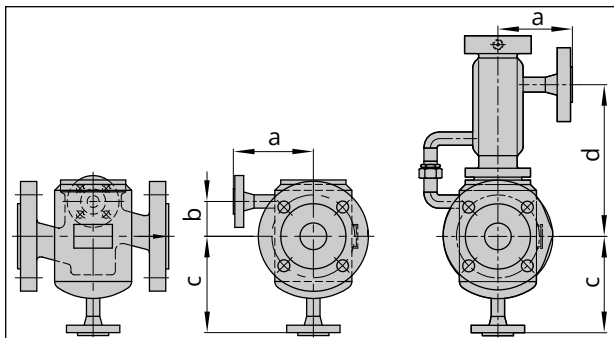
Type 3241 with heating jacket, up to nominal size DN 100/NPS 4 · With insulating section or bellows seal (right)
